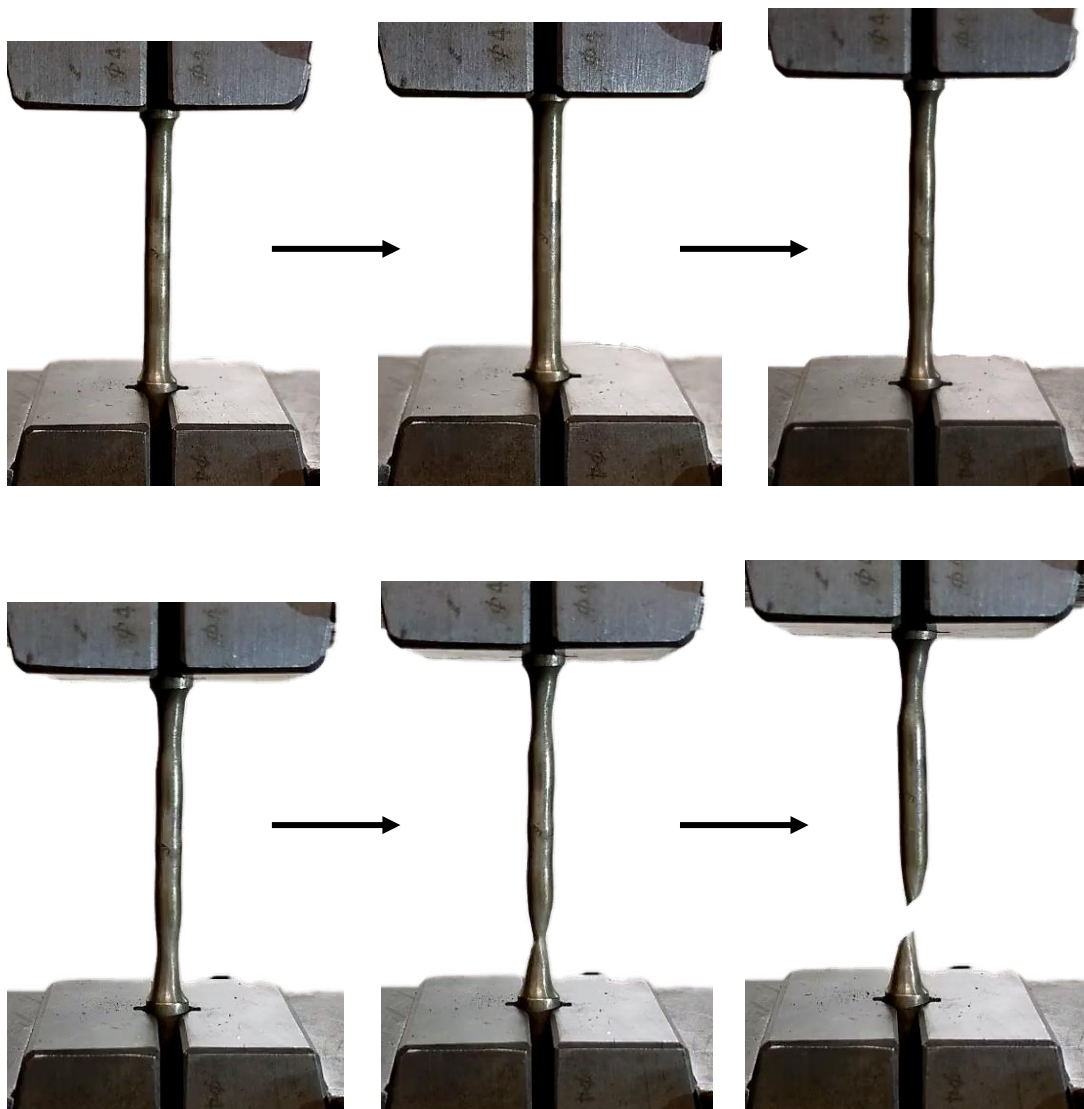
Different stages of the uniaxial tensile test for weld 2 specimen.
